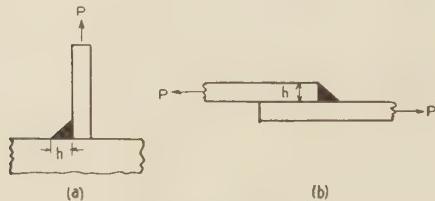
NONSYMMETRICAL FILLET WELDS
